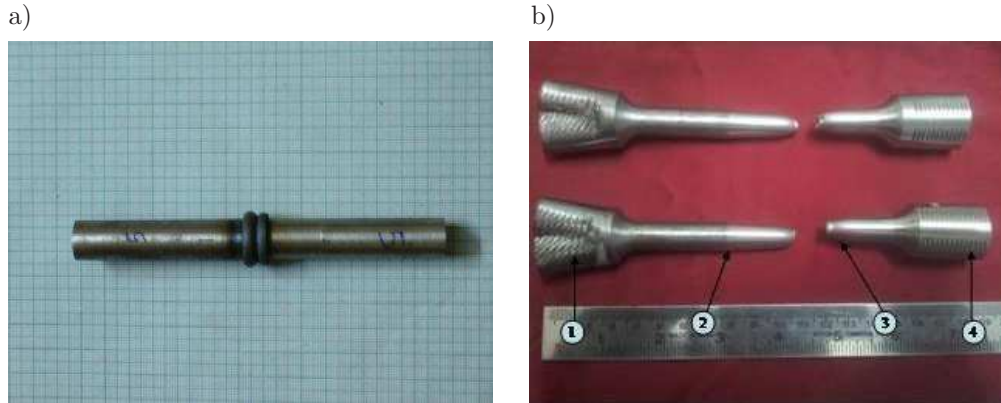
a) Friction welded sample, b) fractured zone of weld joints.
